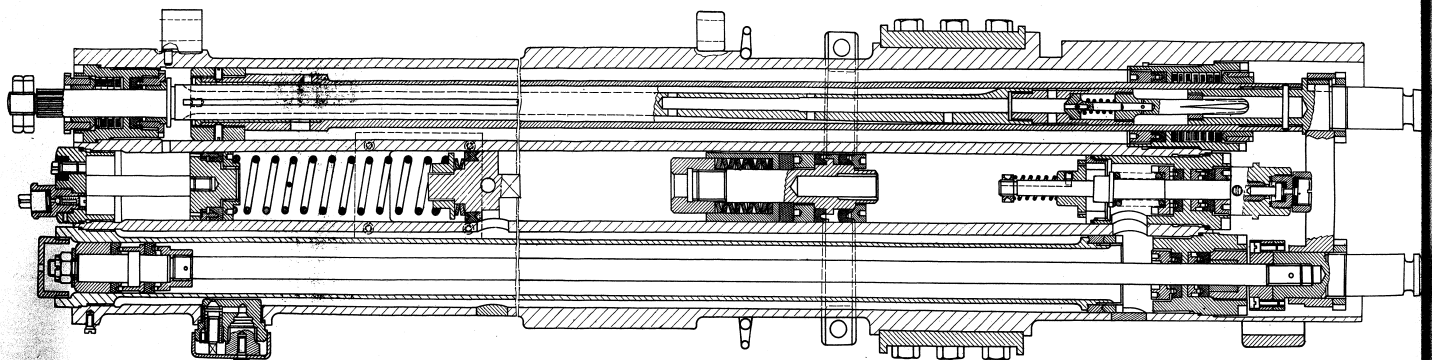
HYDRAULIC RECOIL BRAKE AND RECUPERATOR ASSEMBLY
